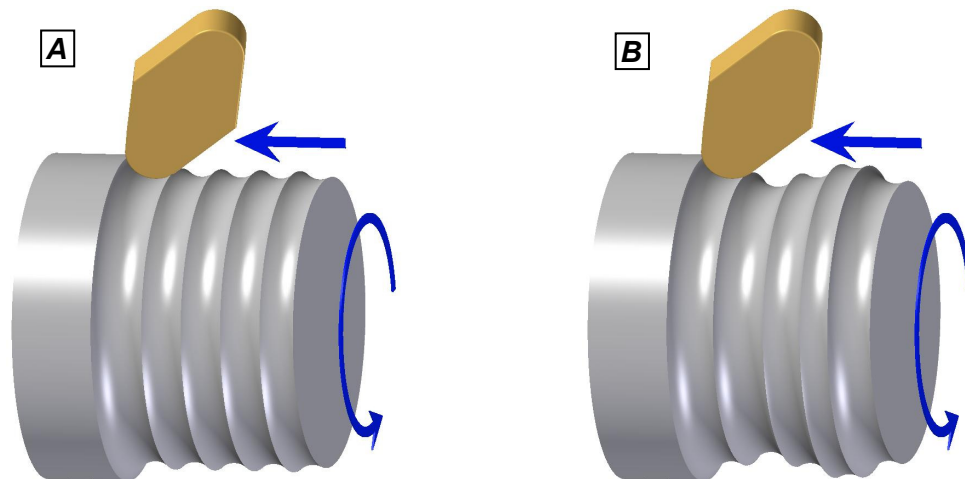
A workpiece and cutting tool with an exaggerated machined surface topography. (A), A stable cutting configuration characterized by relatively low levels of vibration; (B), a chattering cutting configuration characterized by relatively high levels of vibration.
